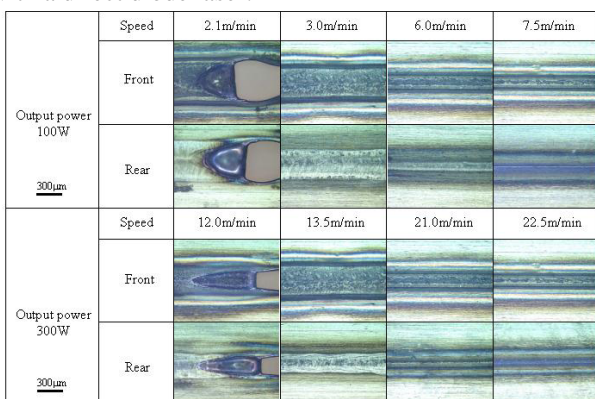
Microscope photographs of front and rear faces of weld beads of 100 μm foil.
